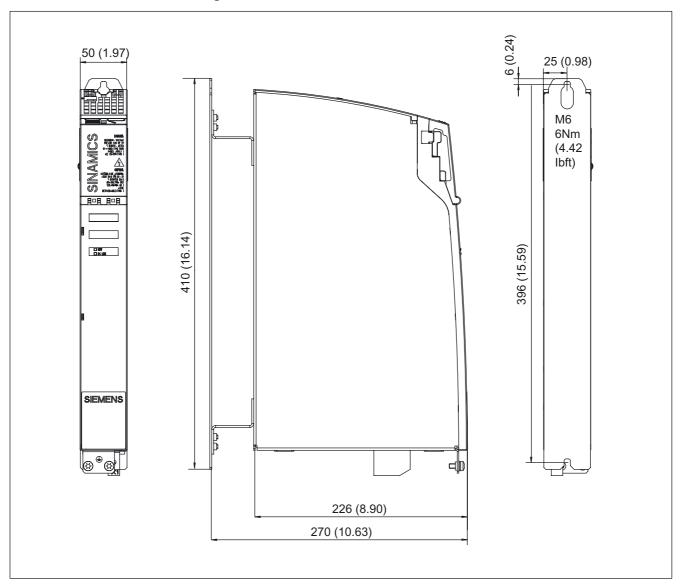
Dimension drawing of the Voltage Clamping Module
